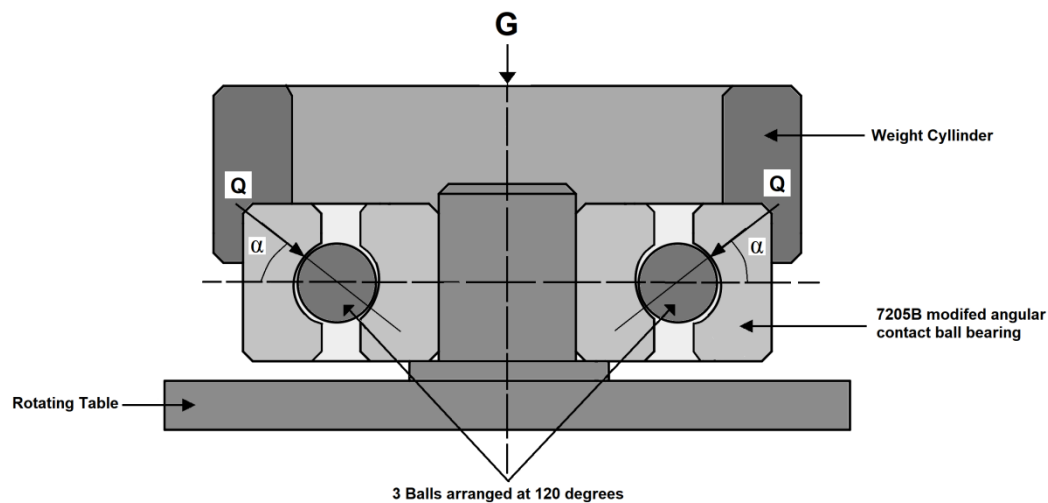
Modified 7205 B angular contact ball bearing with three balls and without cage.
